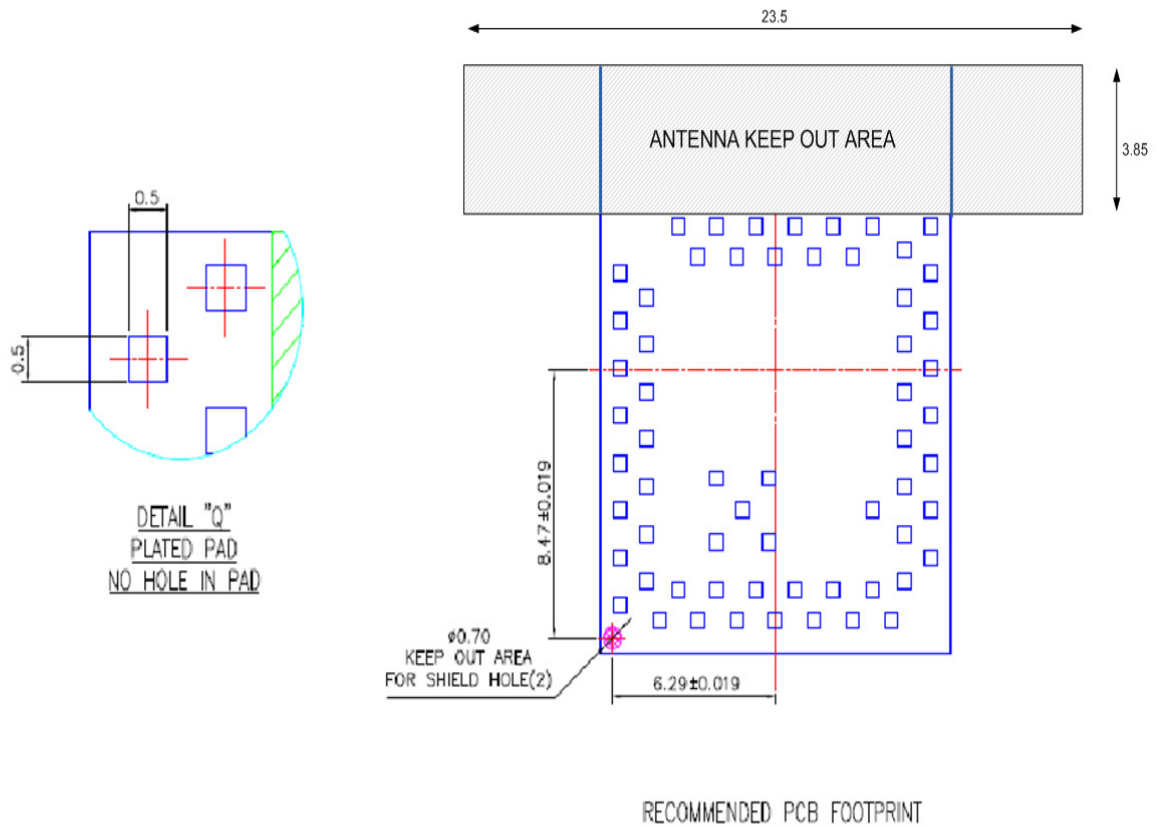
GS2200M Module Recommended PCB Footprint (in millimeters)
